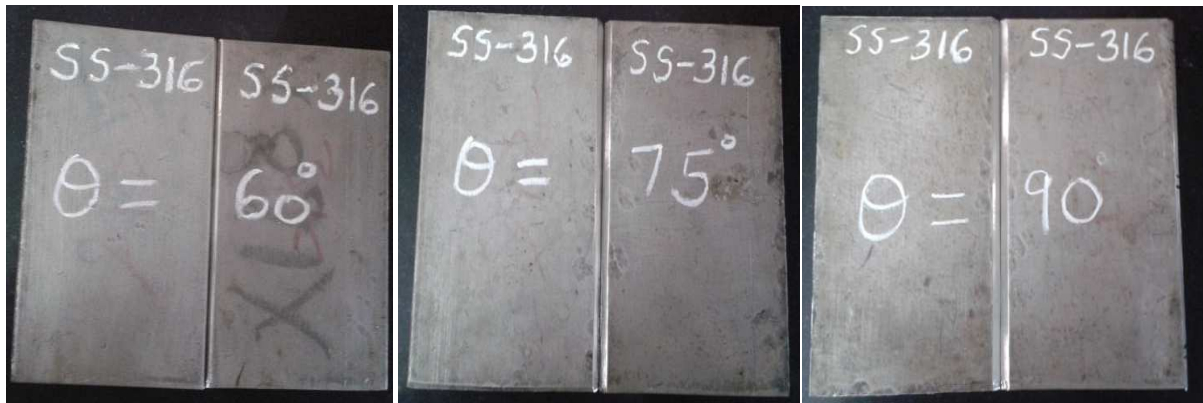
Groove angles on SS 316 welding specimens
